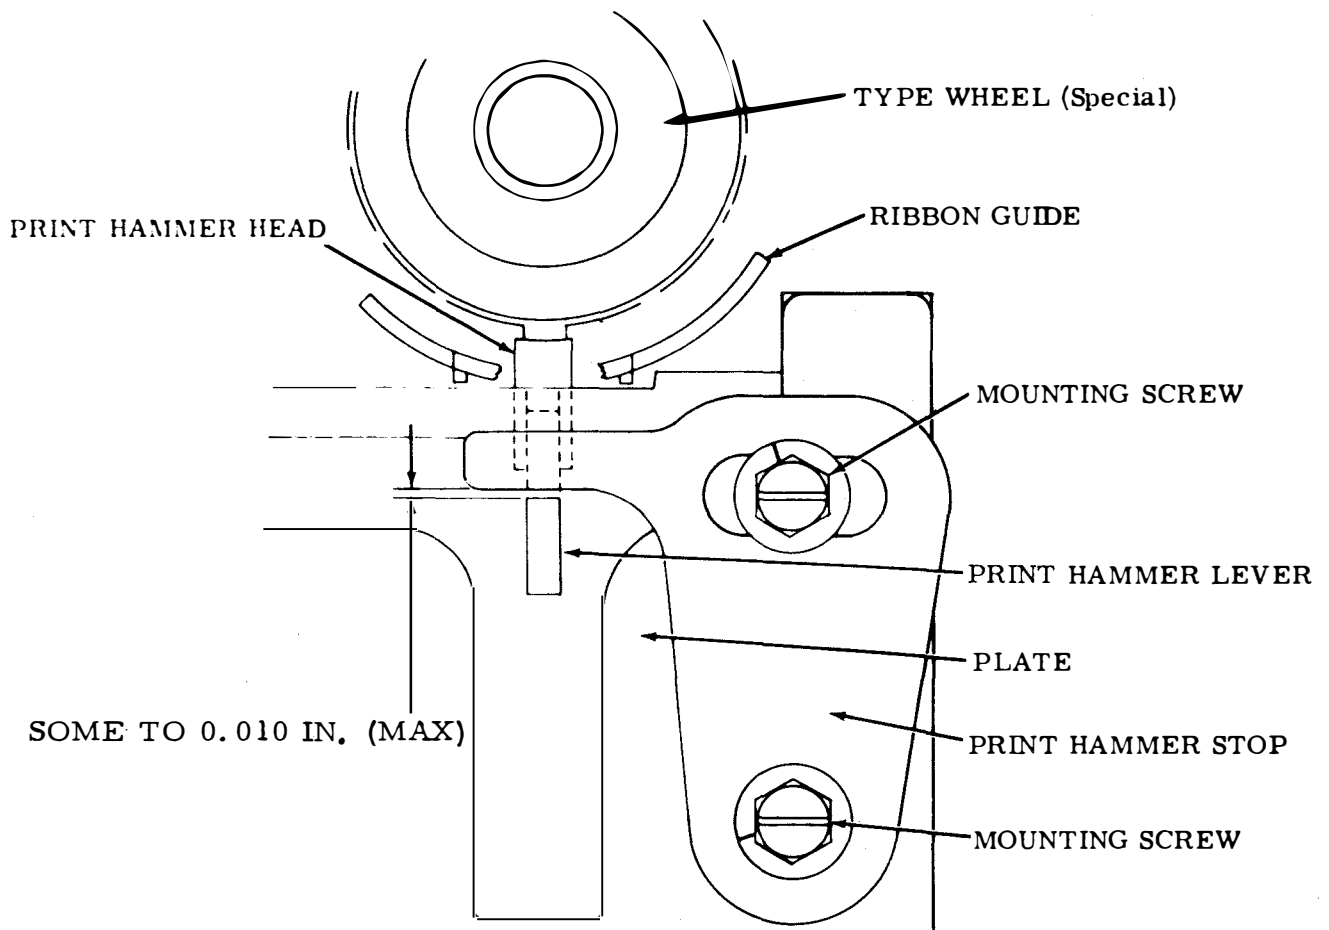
Print Hammer Stop (Preliminary and Final)
